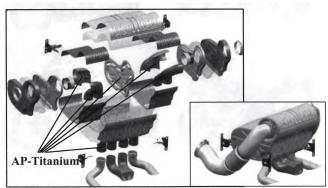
Exploded view of Al-Plated (AP) cp-Ti components in the rear muffler of the Bugatti Veyron
